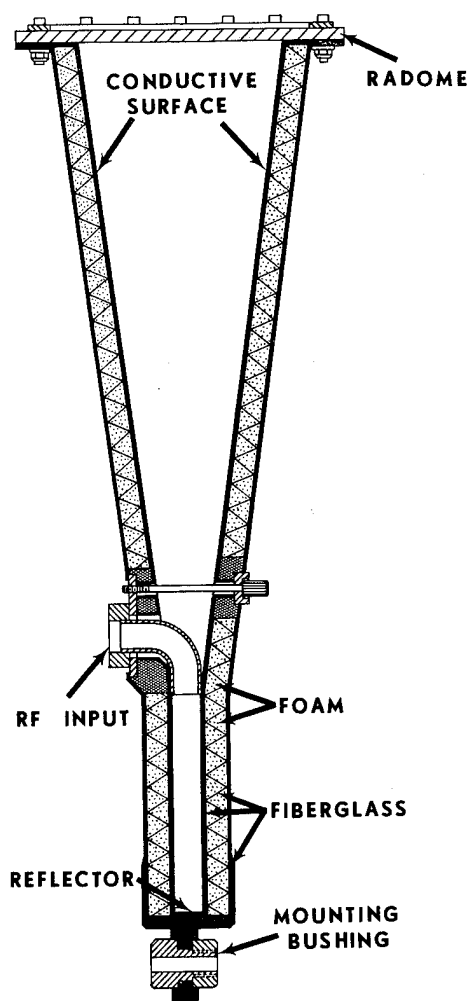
H-Plane Section Showing Truss Core Construction.
